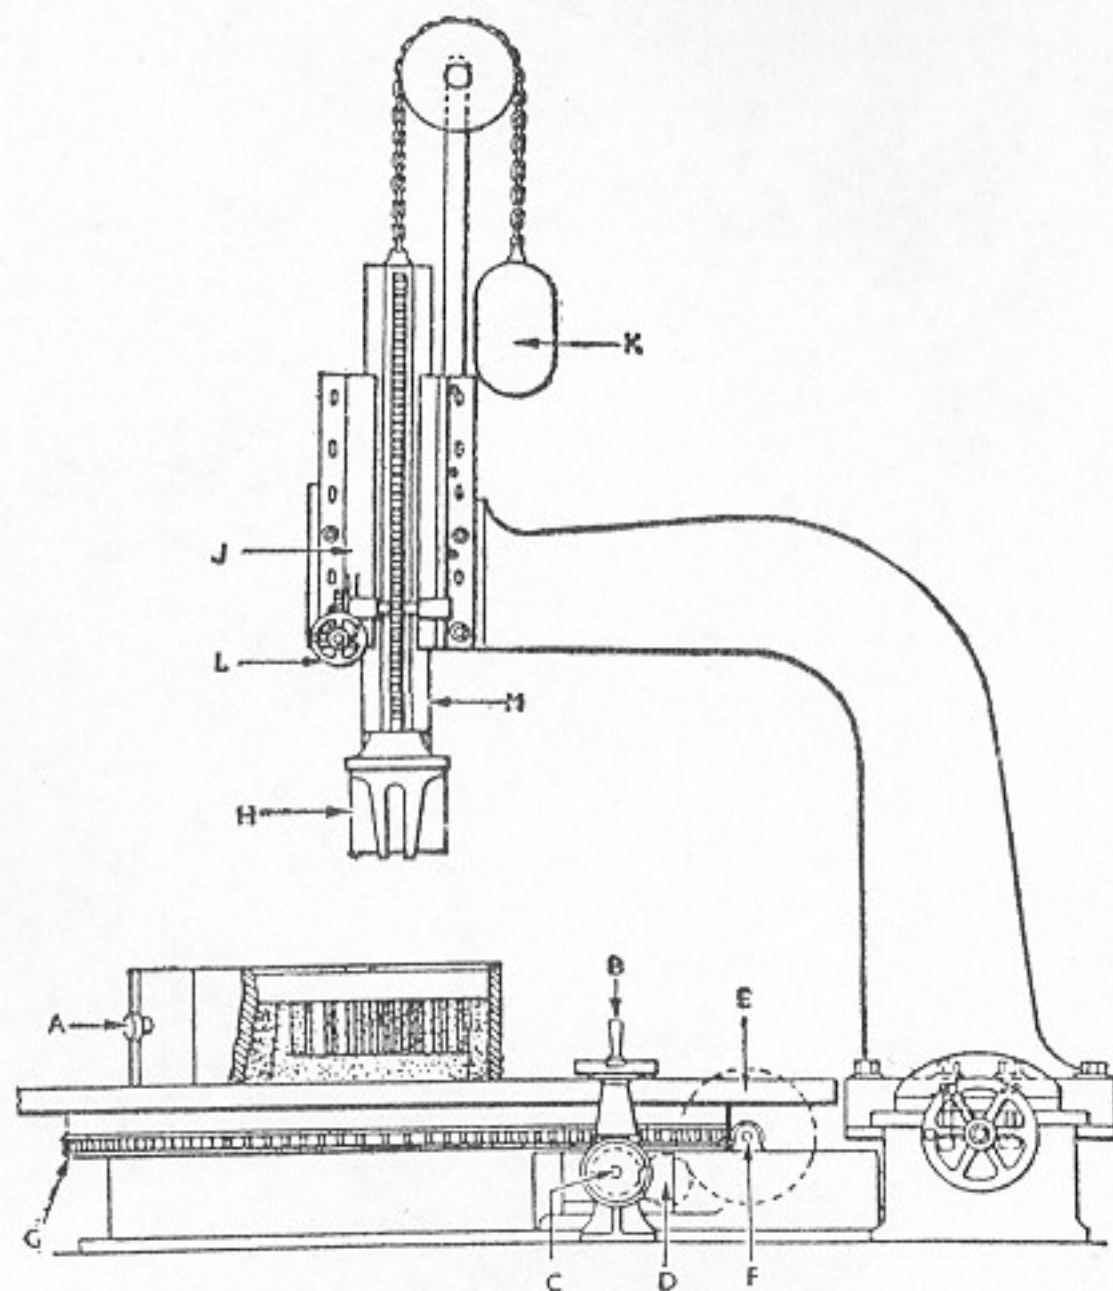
Main features of a gear-molding machine. A, revolving table; B, handle for revolving table; C, bevel gear; D and E, change-gears; F, worm; G, dividing-gear; H, tooth-block; I, carrier; J, guides; K, weight; L, turning-handle.
